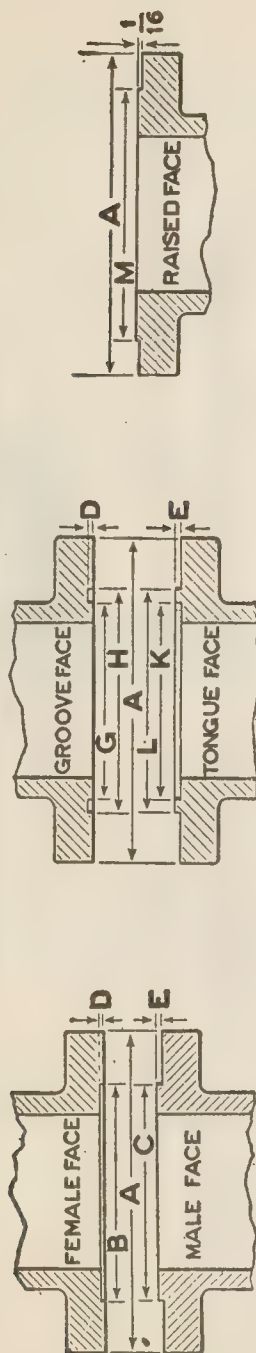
Dimensions of Crane extra heavy companion flanges.
